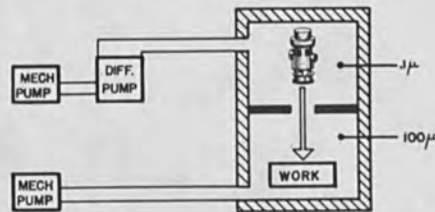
Soft Vacuum Electron Beam Welding Machine Concept.
